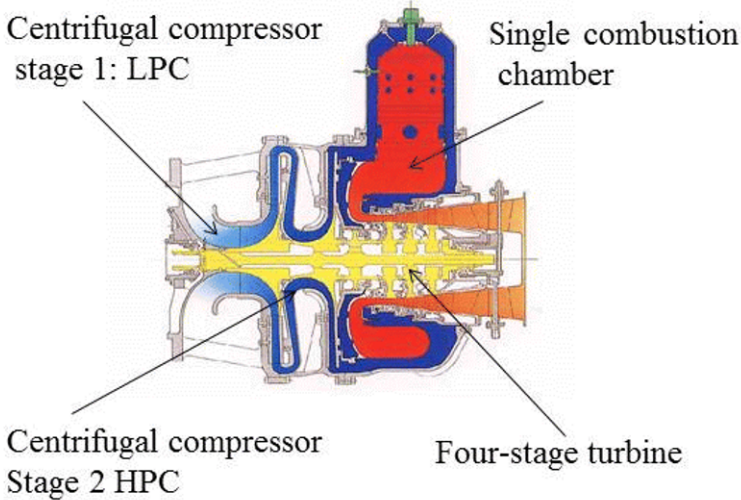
A Kawasaki small gas turbine with two centrifugal compressors, a four stage turbine and a single combustion chamber.
